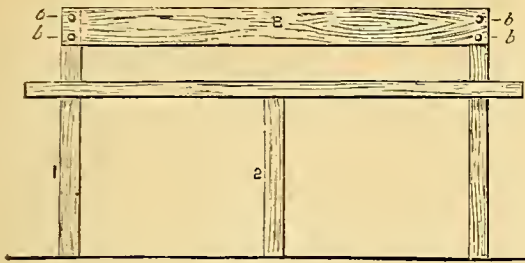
FRONT ELEVATION. Scale,  $\frac{3}{4}$  in. to 1 foot.
